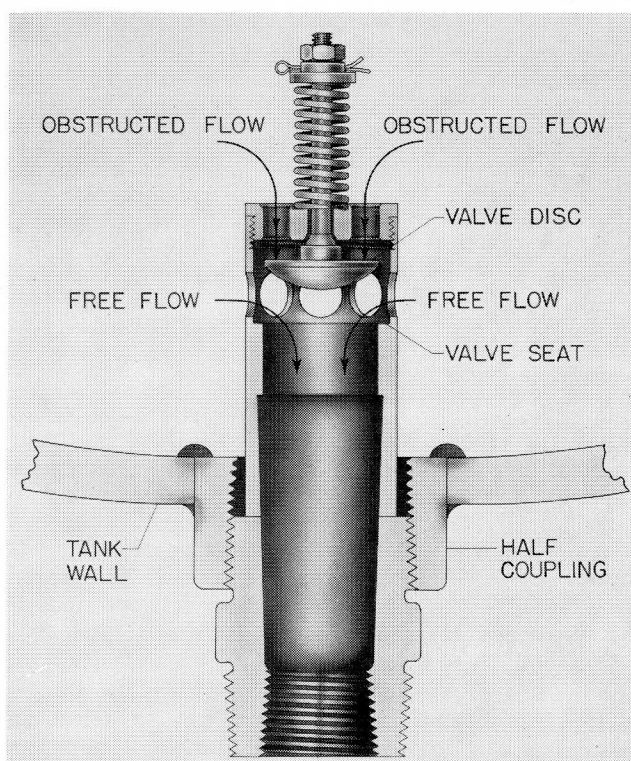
Free-flow type threaded excess-flow check valve having long body (such as Rego No. A-7537-FL), mounted in tank liquid outlet made from half coupling. Note that side holes for free-flow of liquid are 3 inches above bottom of tank. Tank can never be completely drained of liquid, but foreign matter that may have settled to tank bottom cannot easily enter pump inlet line. Recommended for old tanks that may have been out of service for some time, as rust and scale from tank is less likely to damage pump or meter. Compare with figure 3.
